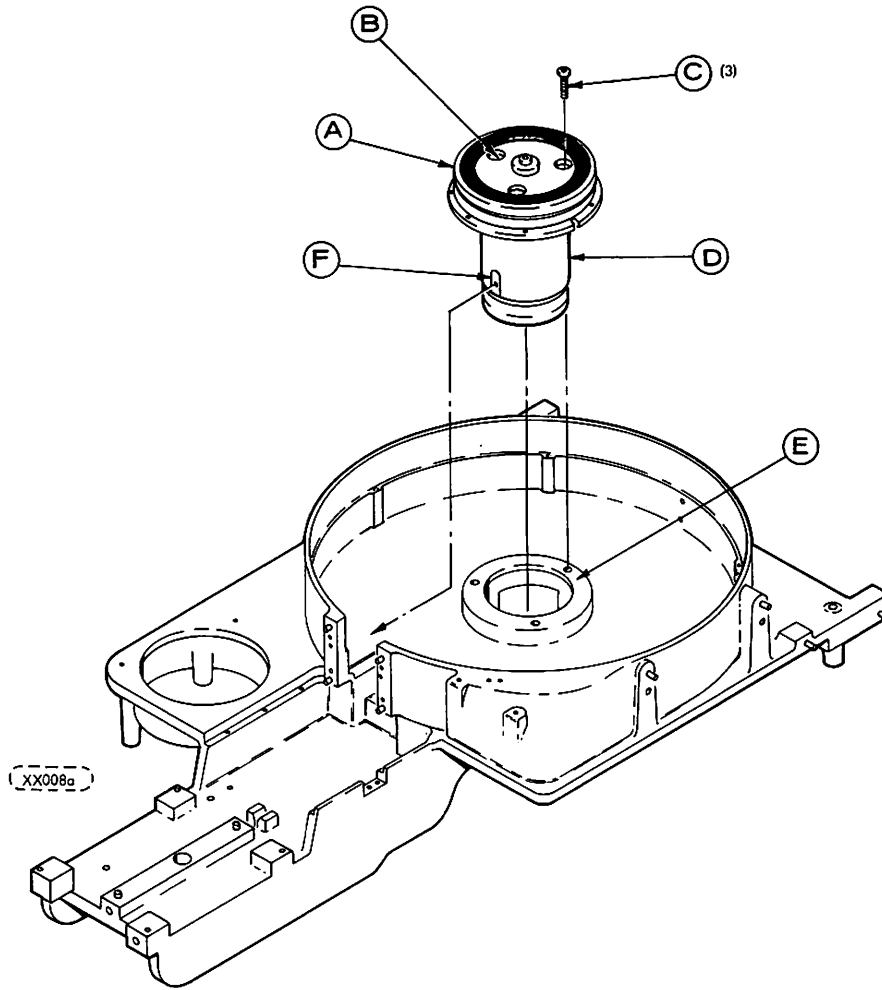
SPINDLE REMOVAL AND REPLACEMENT
